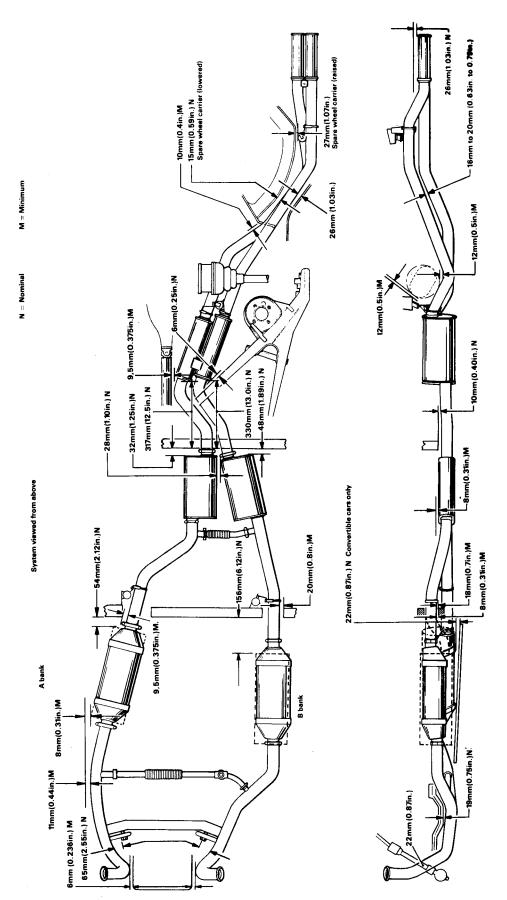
FIG. Of TWIN EXHAUST SYSTEM - CLEARANCE DIMENSIONS
